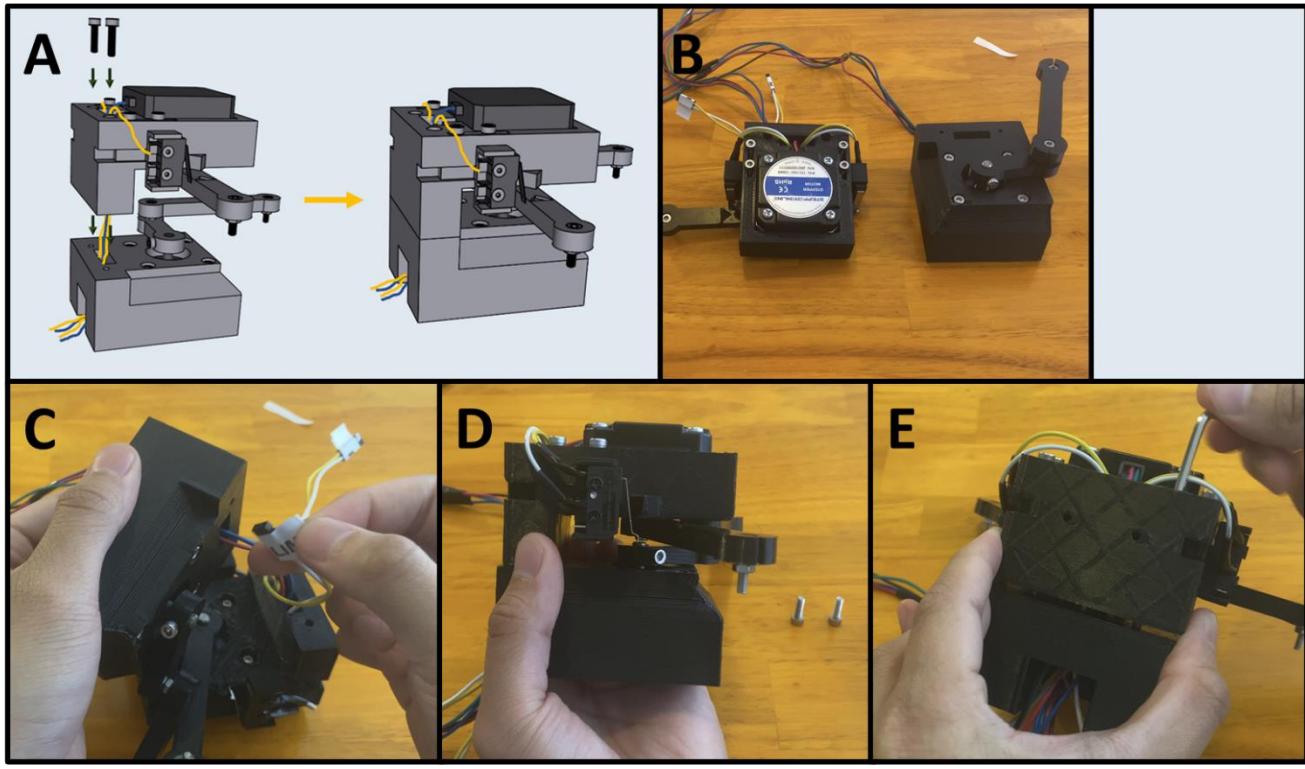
e: The procedure for joining the Upper and Lower Motor Assemblies.
